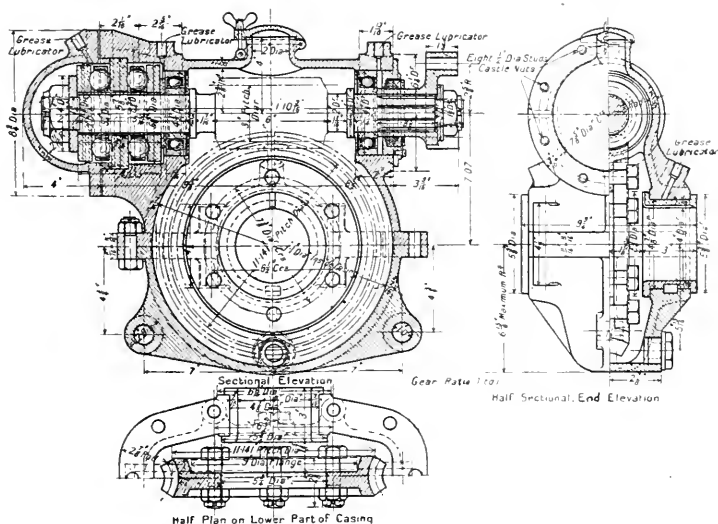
WORM DRIVE OF BAGNALL LOCOMOTIVE
